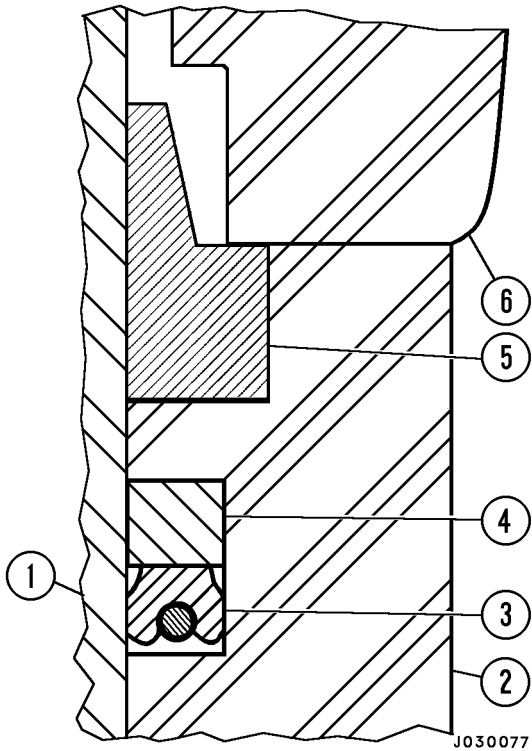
VALVE BODY SEAL INSTALLATION
